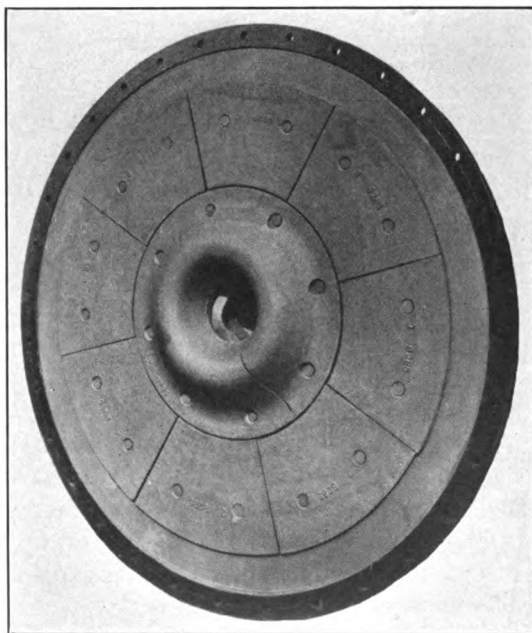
Feed head lining of 5 by 8-ft. tube mill at the United Gold Mines Co. mill, Oregon.
